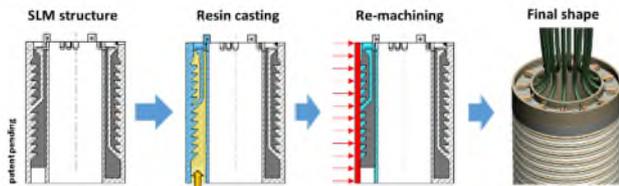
New SRA rotor manufacturing sequence (patent pending)
